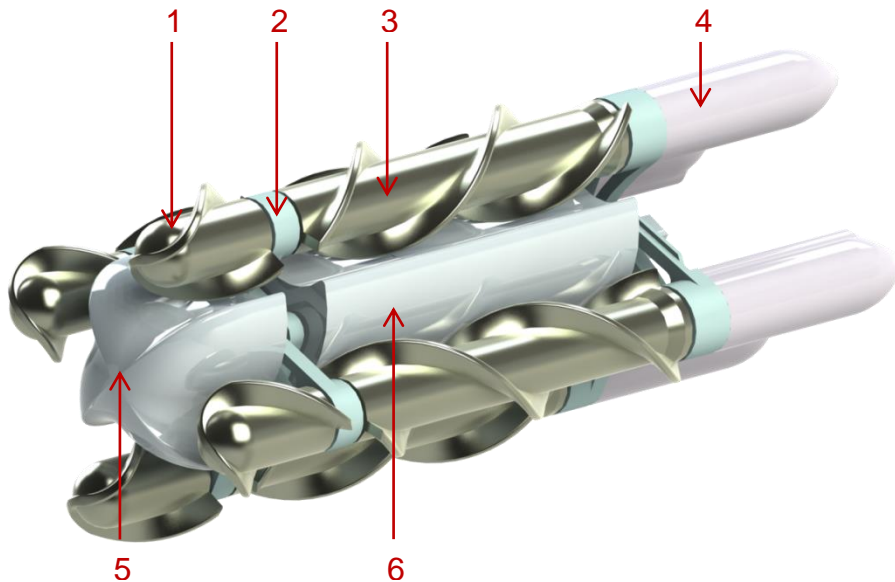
Computer model showing the final design of the locomotion system. Annotations show: 1) Front-section screw; 2) Controllable arm section; 3) Mid-section screw; 4) Screw motor housing; 5) Front chassis section with space for camera module; 6) Central chassis section housing arm motor and gears.
